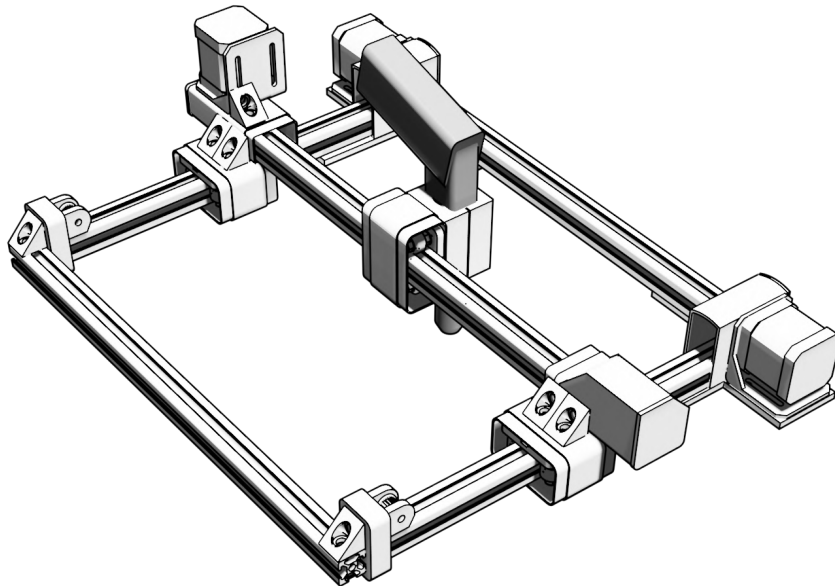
Rendered representation of the global mechanical drive assembly of the robot.
